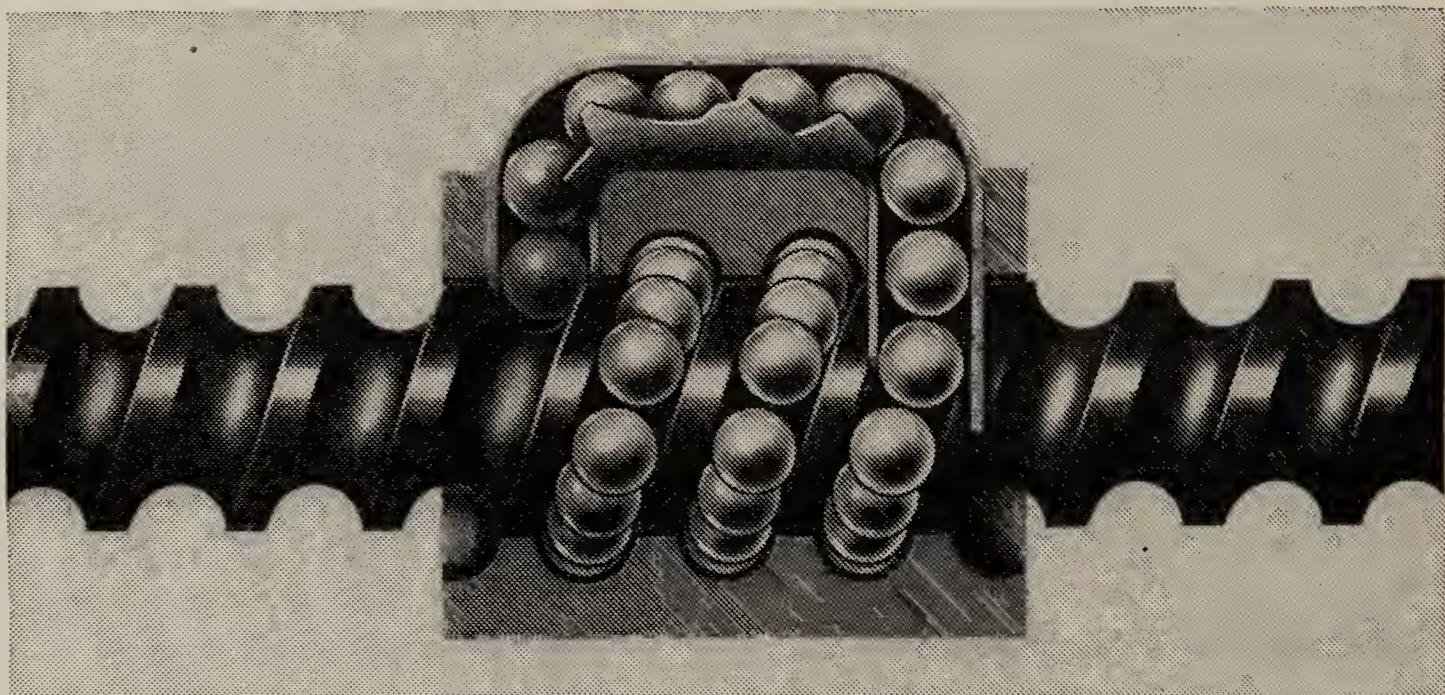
Ball-bearing screw and nut. (Courtesy of Saginaw Steering Gear Division, General Motors Corporation.)
